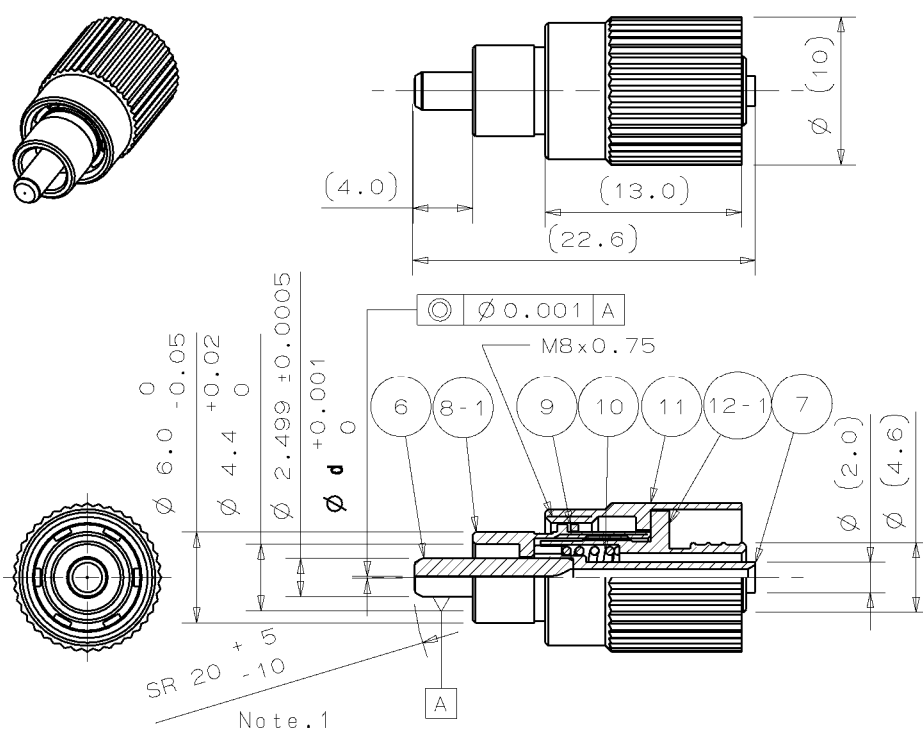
SAP-8 Series Connector Plug (Machining Frame Type)
